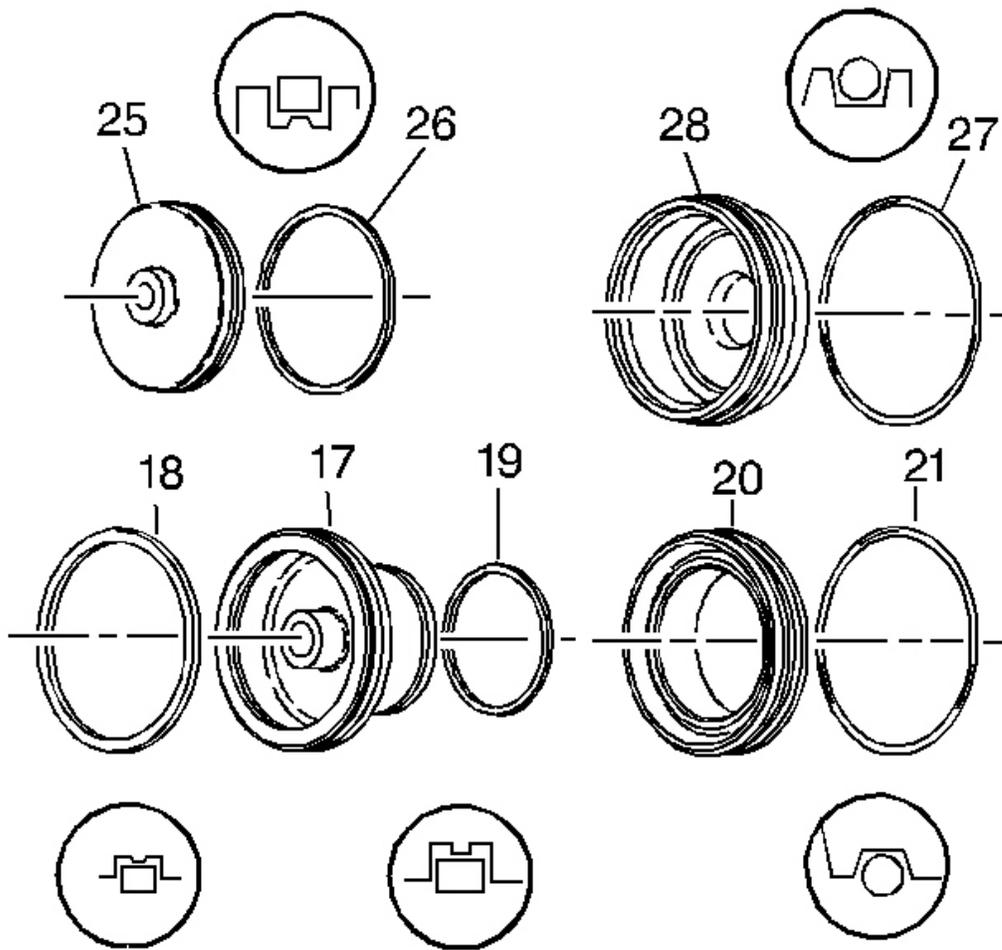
Inspecting 4th Apply Piston, 2-4 Servo Cover, 2nd Apply Piston, Servo Piston Inner Housing
